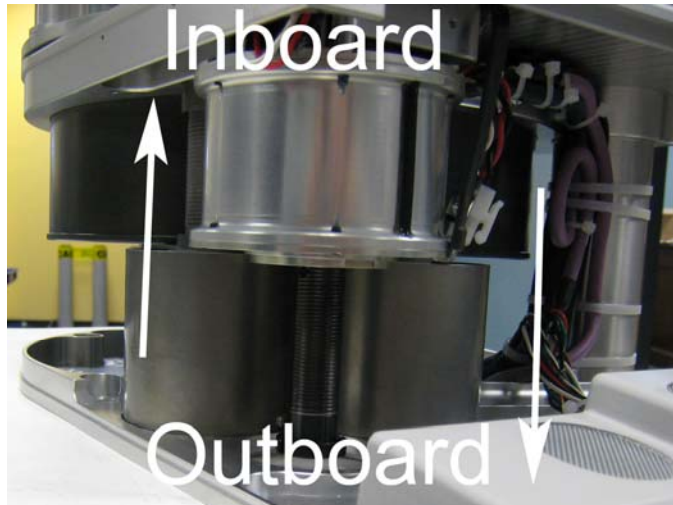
Inboard and Outboard Directions Defined for Motor-1 Cable Drive
